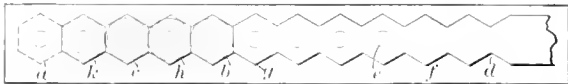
Sectional View of Dies and Punches for Making Nuts
